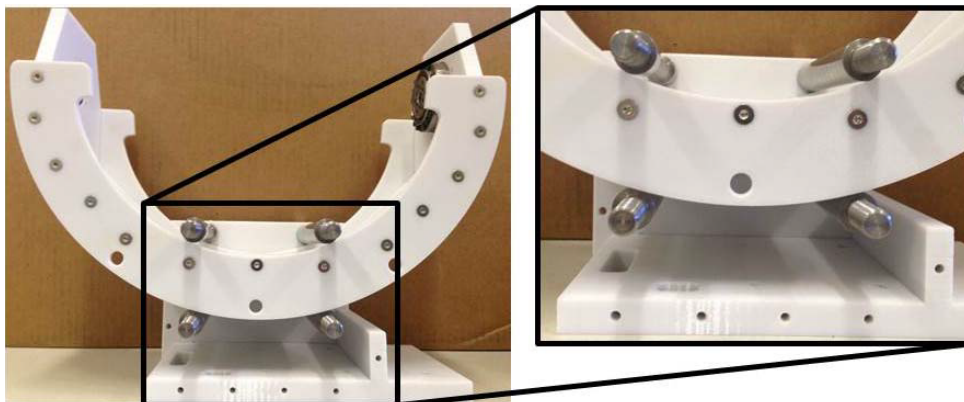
Cutaway of CMG skew angle adjustment mechanism
